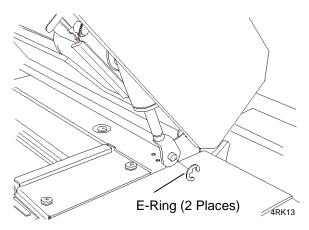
Removing (2) E-Rings from the Gas Springs (one each on oposite ends).
